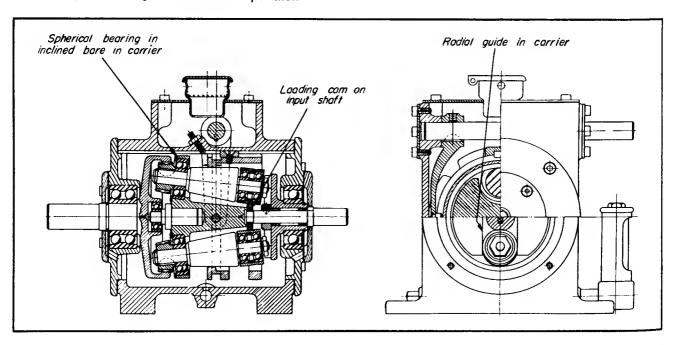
Belaw—Second design employed tarque-responsive loading applied through a cam on the input shaft
